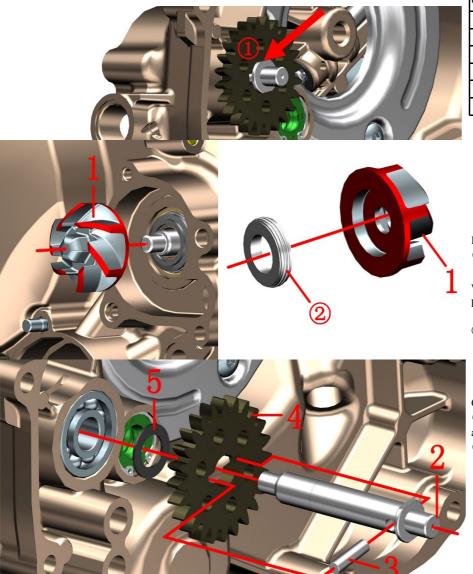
RIGHT CRANKCASE COVER ASSEMBLY		Disassembling the water pump assembly-2	CHK	Q
